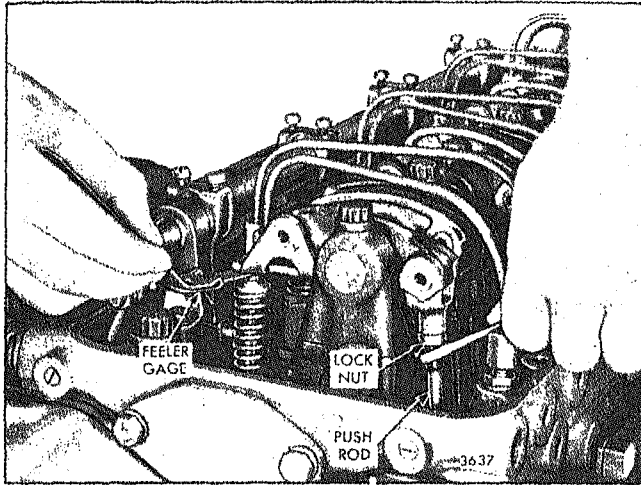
Adjusting Valve Clearance (Four-Valve Cylinder Head)
